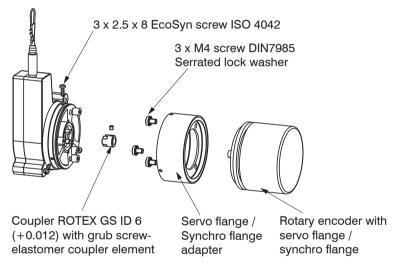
Mounting of adapter flange and encoder, WPS-2400-MK60-M
